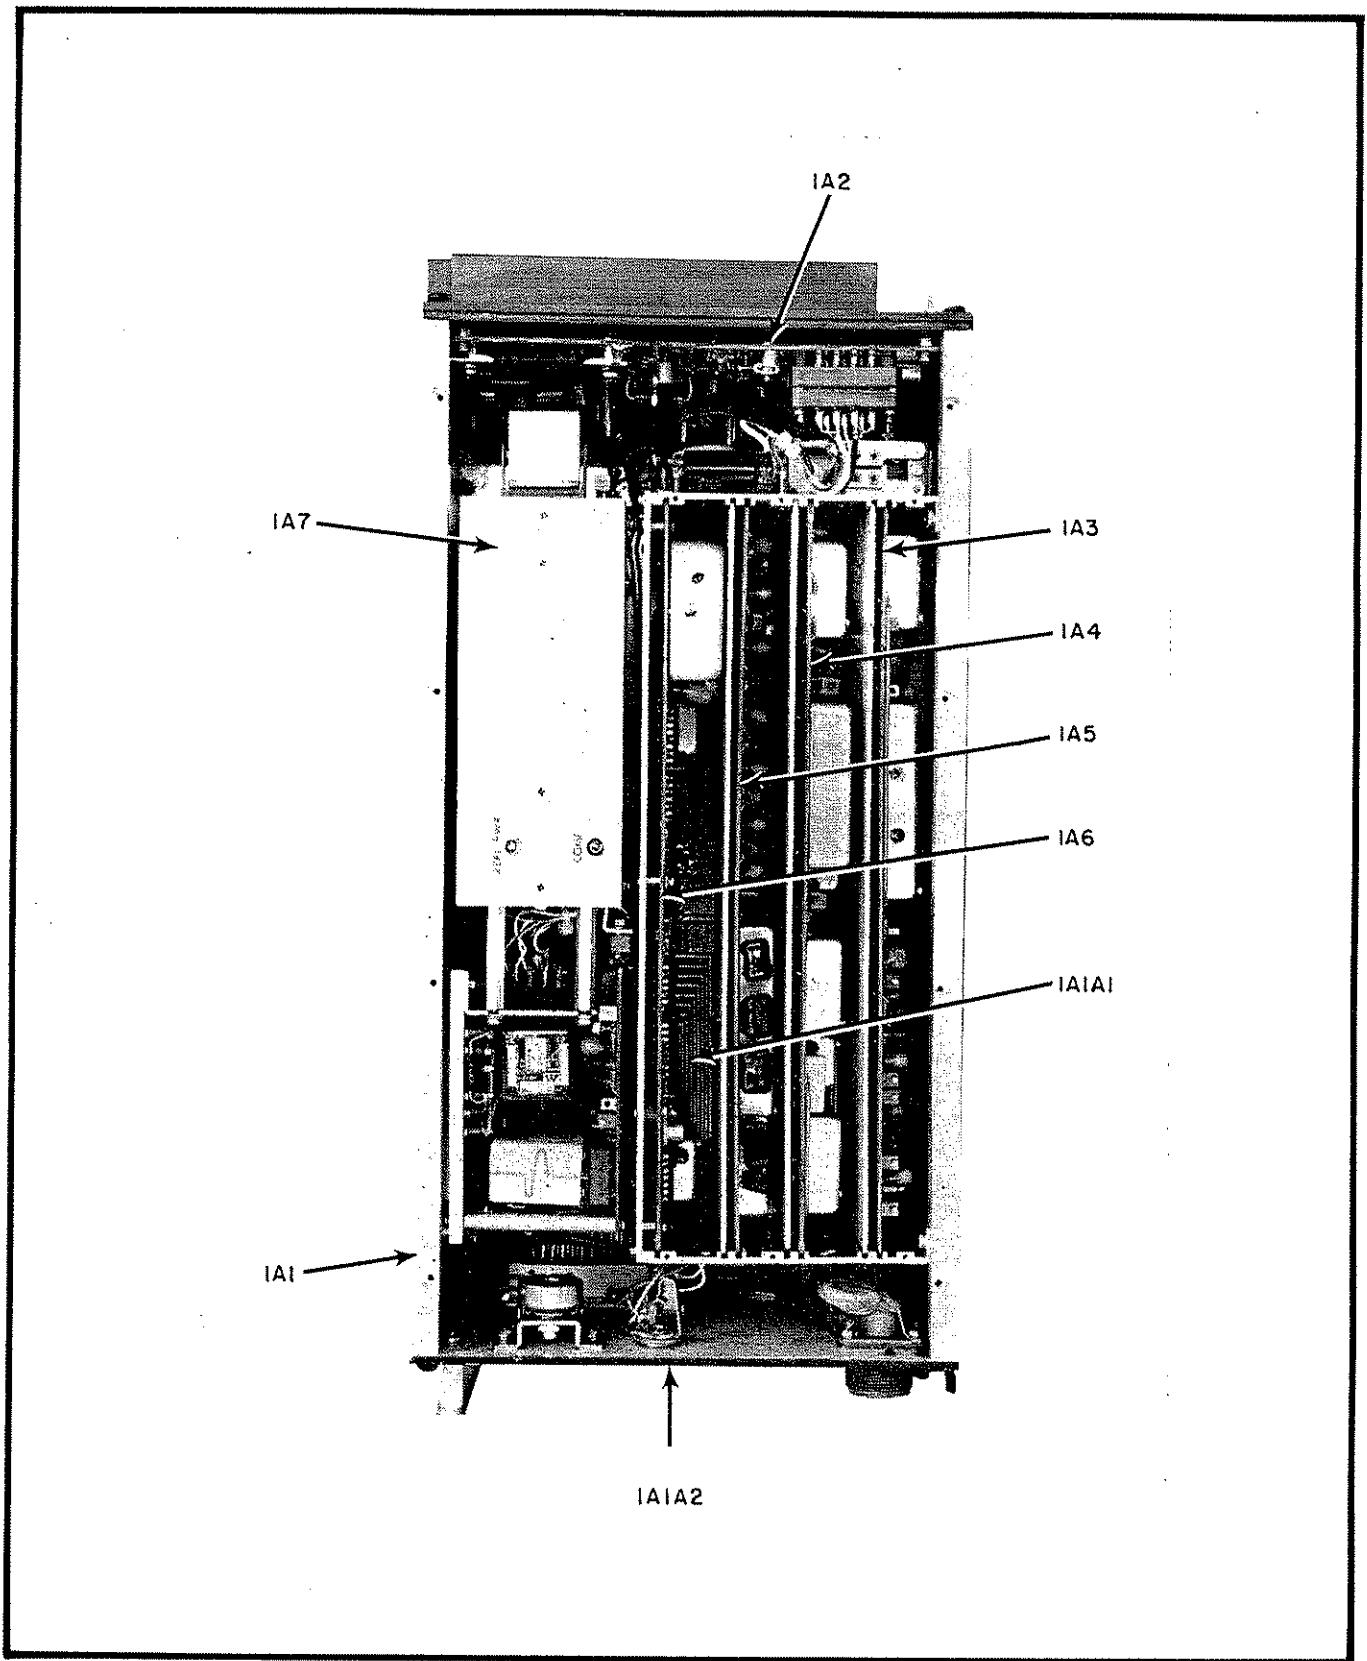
ASB-500 Right Side View and Table of Assemblies
